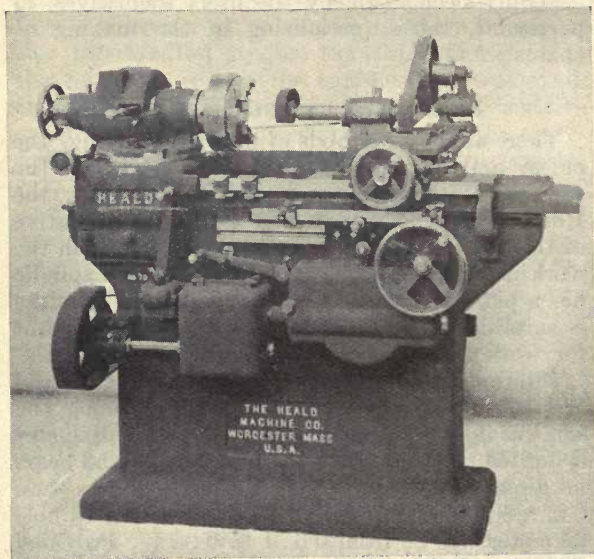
HEALD INTERNAL GRINDING MACHINE
